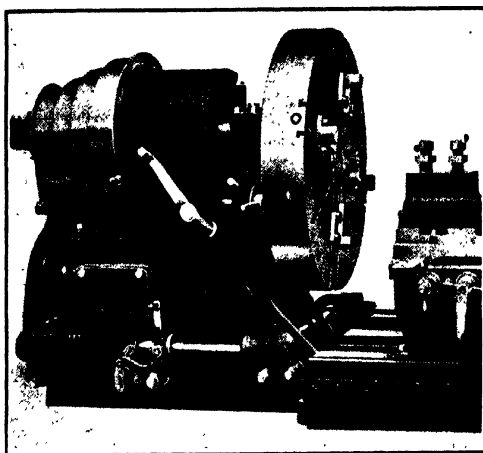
Headstock of Lang's 6 ft. surfacing lathe.
